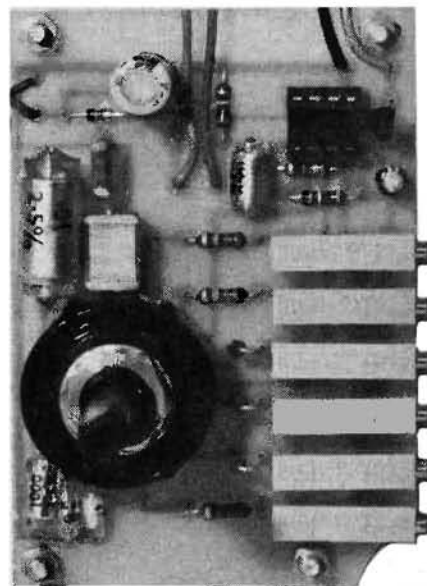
(Above left). The copper track pattern for the printed circuit board is shown here full size. The component layout together with a photograph of the prototype p.c.b. is also shown full size. Note that the rotary switch will need to have the ends of the tags cut off to allow them to pass through the holes in the p.c.b. The two 9V batteries can be secured into the box either by specially made metal straps or with self-adhesive pads
